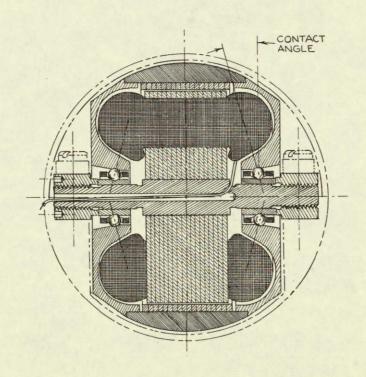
SPHERICAL WHEEL - DB PRELOAD SCREW ADJUSTABLE - NO SPACERS
